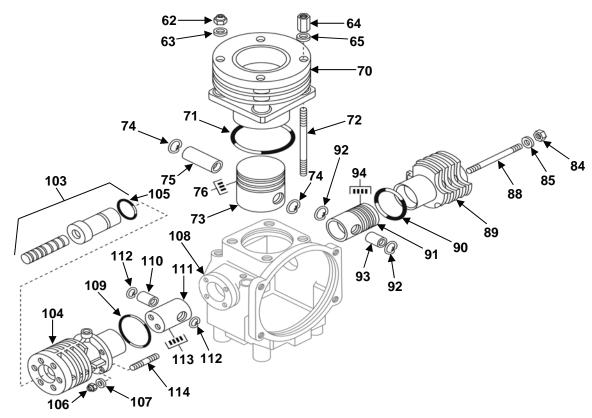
Disassemble Air Compressor First, Second and Third Stage Components. (Sheet 2 of 2)
